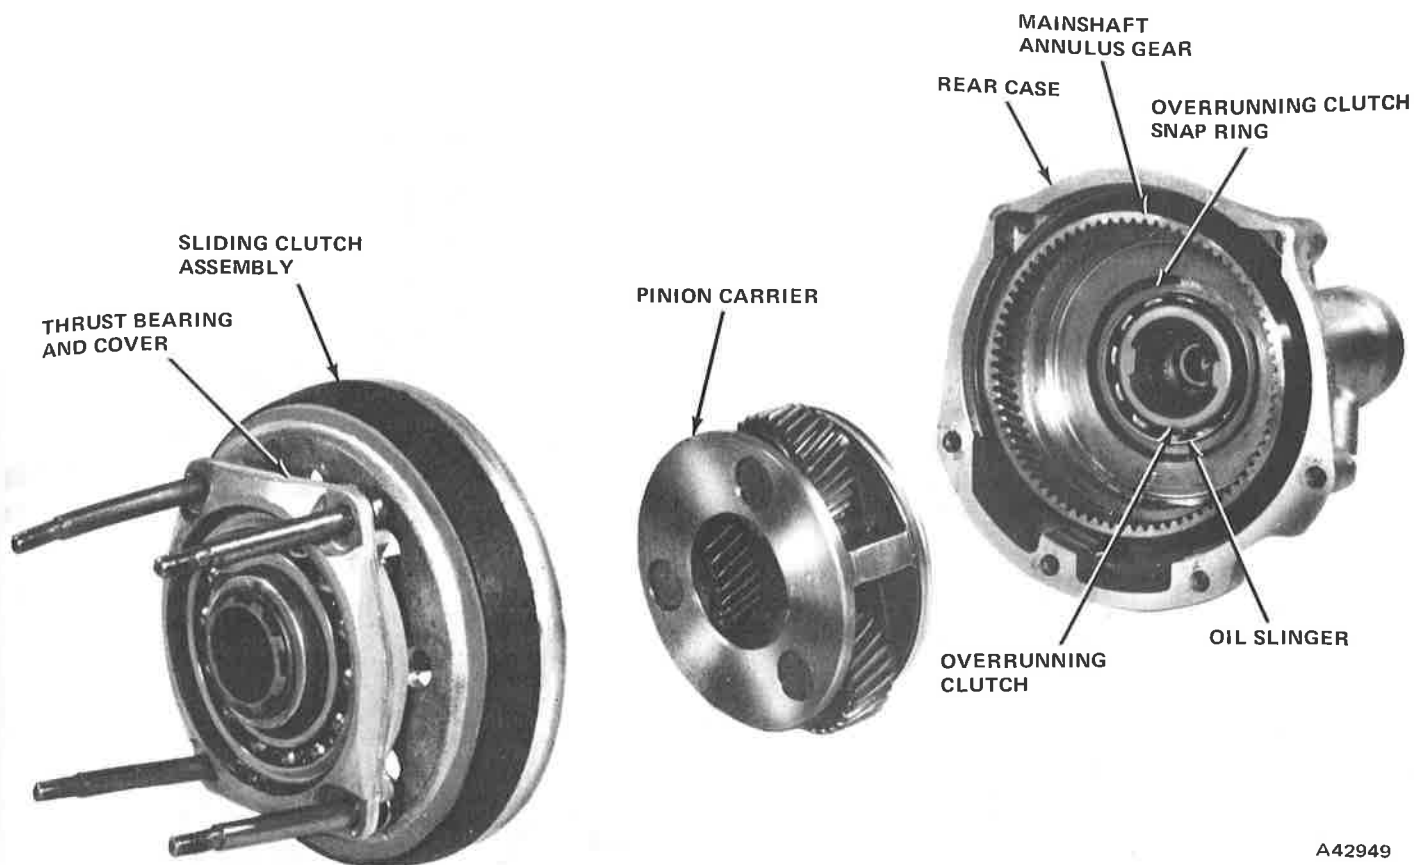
Sliding Clutch Assembly and Pinion Carrier Removal and Installation
